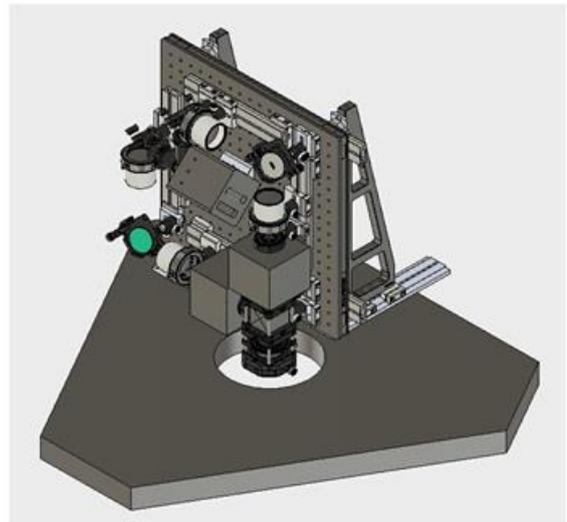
Mounted at 90 degrees to Telescope Mounting Plate
